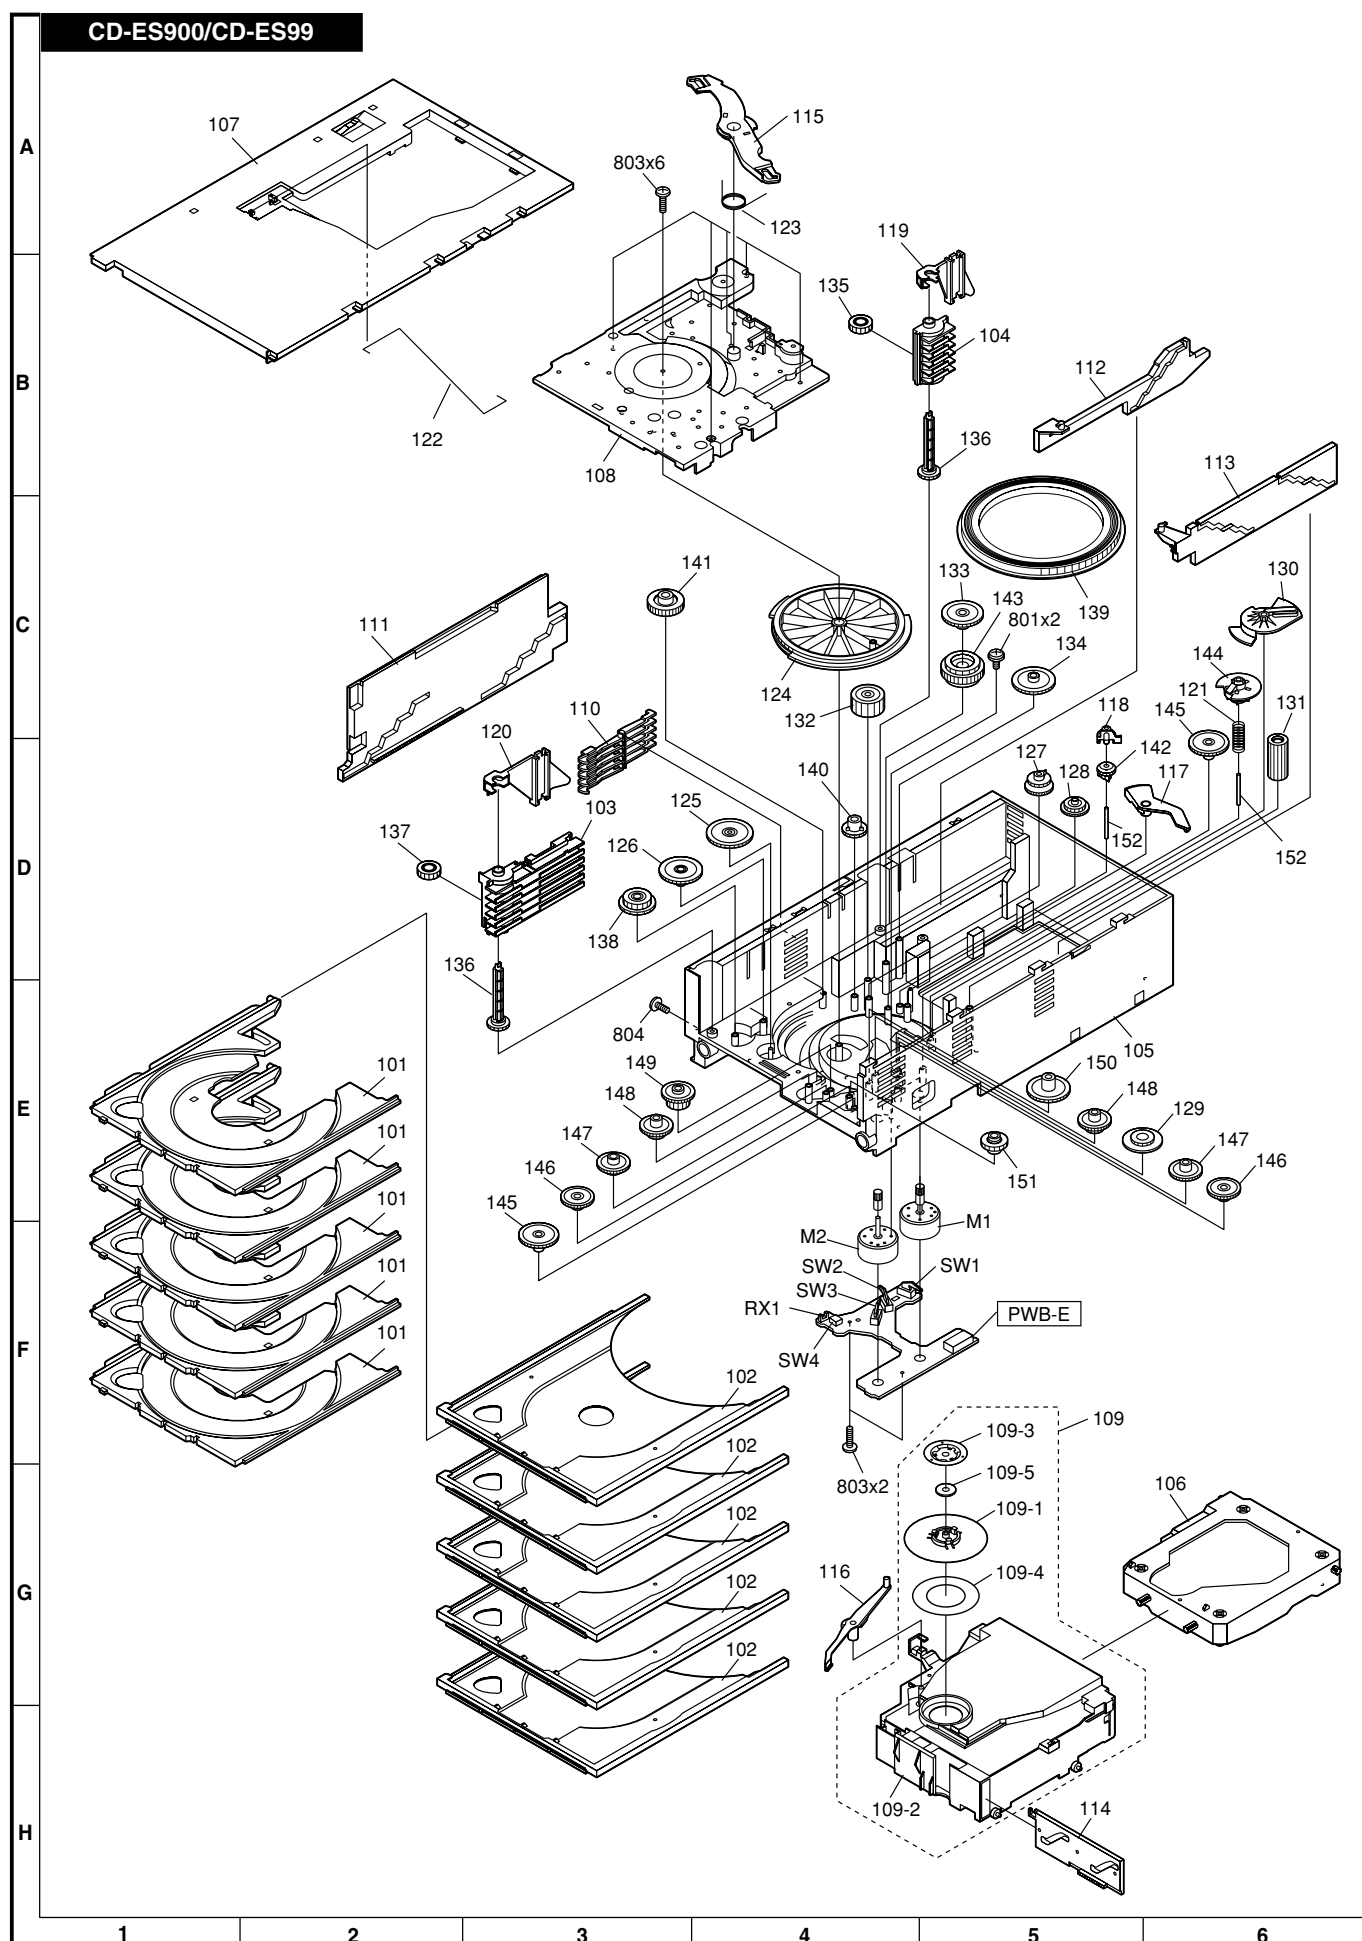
CD CHANGER MECHANISM EXPLODED VIEW
